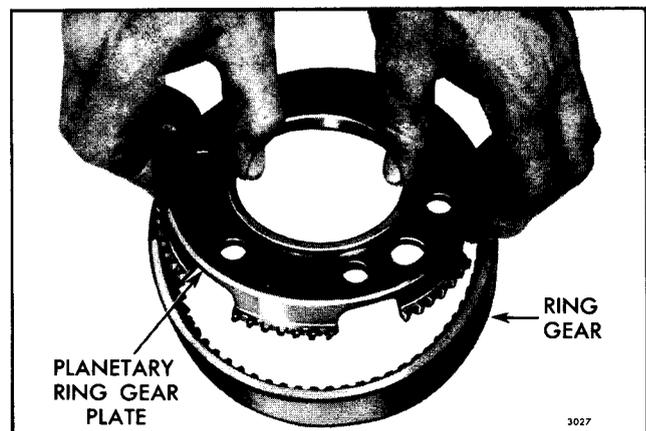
Installing Reduction Gear Planetary Ring Gear Plate in Ring Gear (2.5:1 and 3:1 Ratios)
